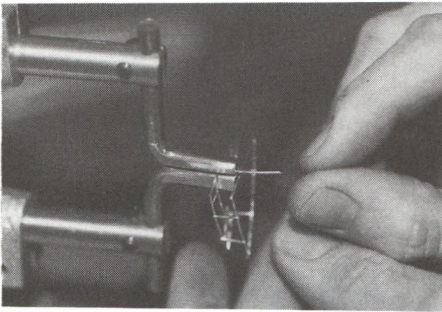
Release wire just before welding. Any load on the part when the weld is made can cause distortion.
